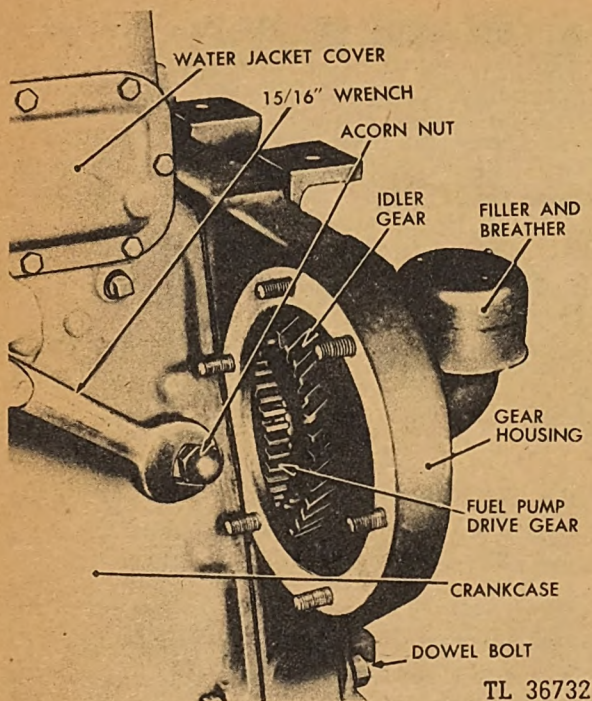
Removing Idler Gear Stub Shaft Setscrew Acorn Locknut
